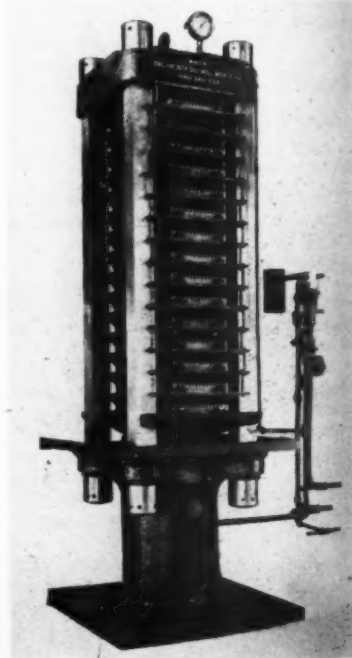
VERTICAL STEEL PRESS FOR REMOVING COTTONSEED OIL FROM THE MEATS. (Courtesy of the French Oil Mill Machinery Co.)
